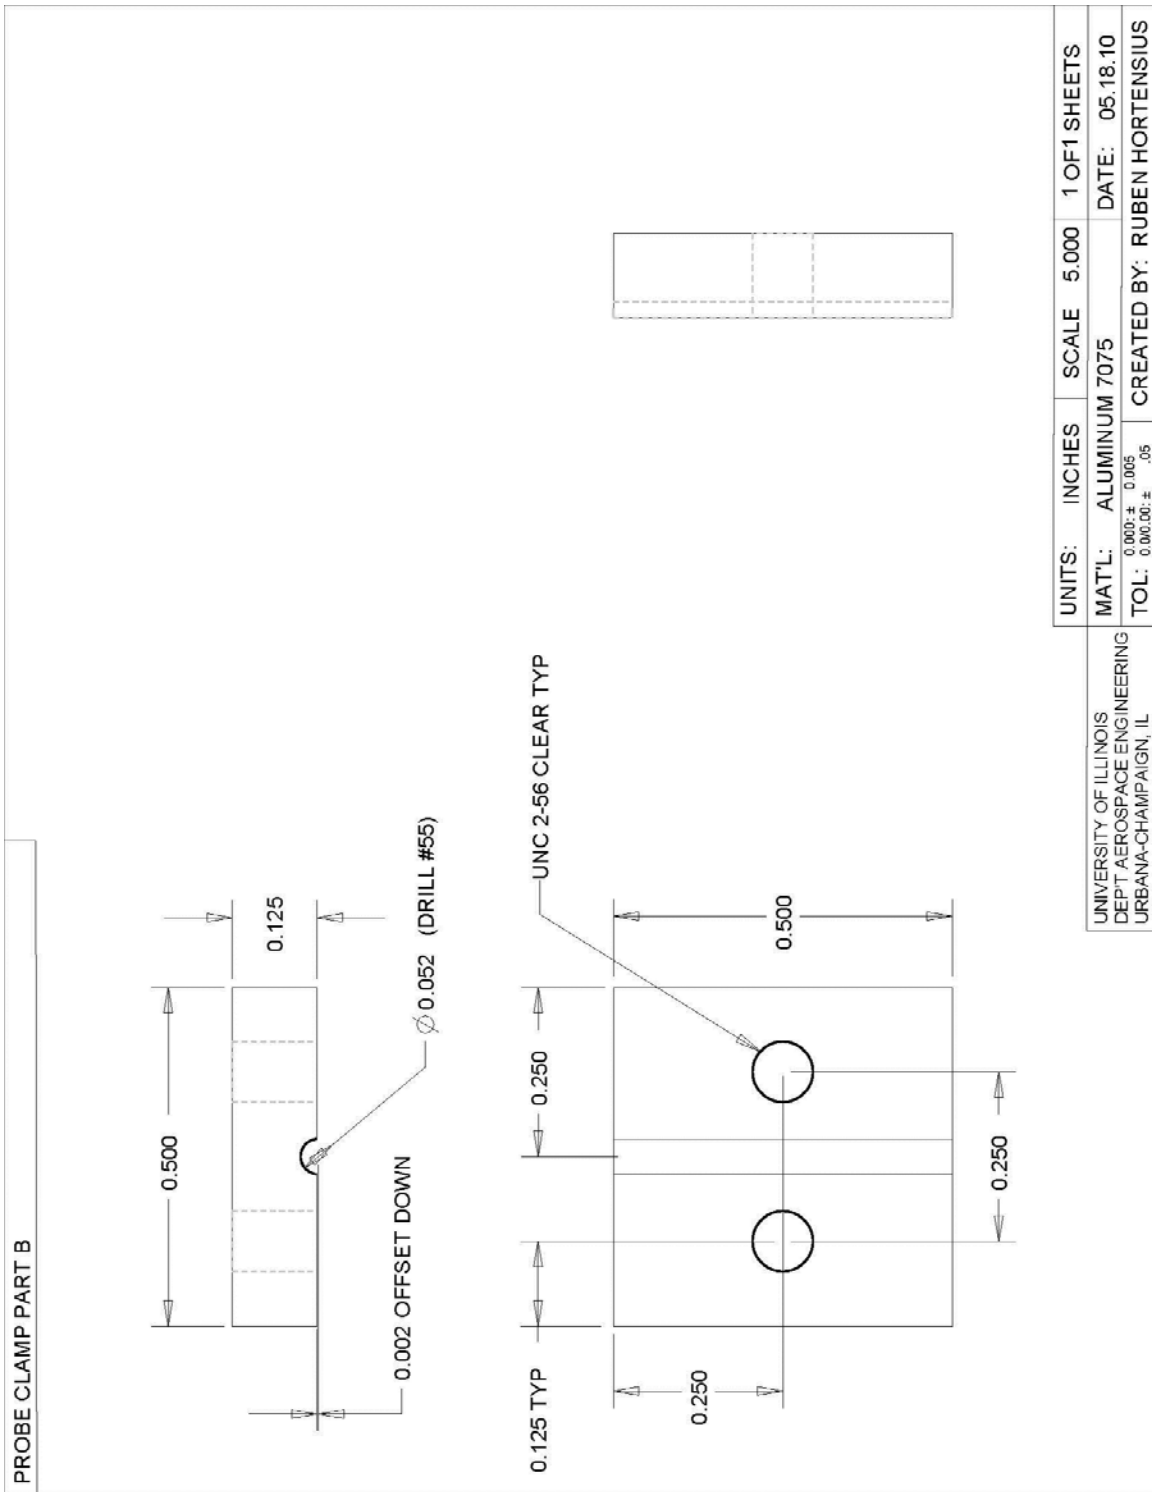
Probe Traverse Clamp Part B Engineering Drawing.
